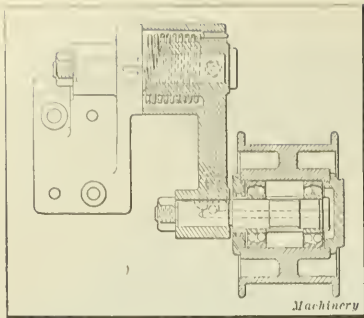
Idler Pulley for maintaining Constant Tension on Wheel-spindle Driving Belt
